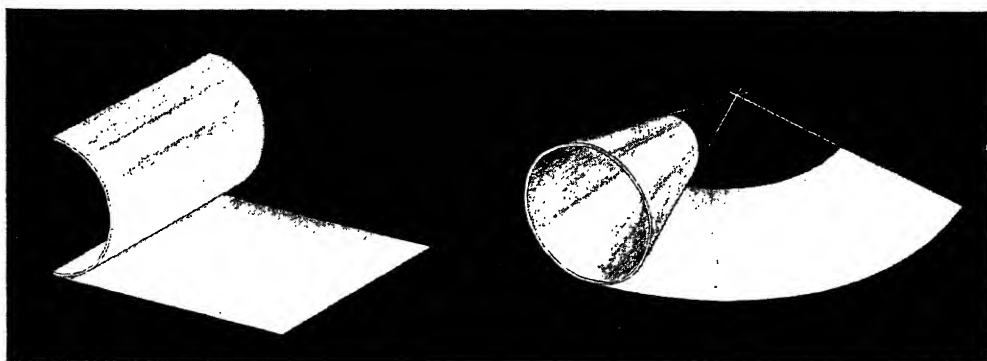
Flat Pattern for a Half Cylinder and a Frustum of a Cone.
